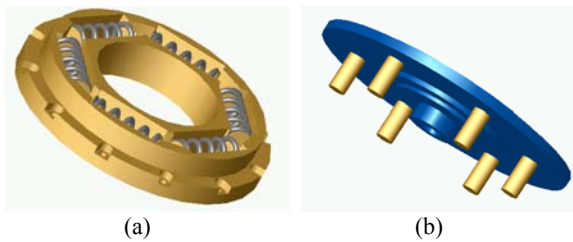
A three-dimensional model of the spring component: (a) a lower part, (b) a upper part.
